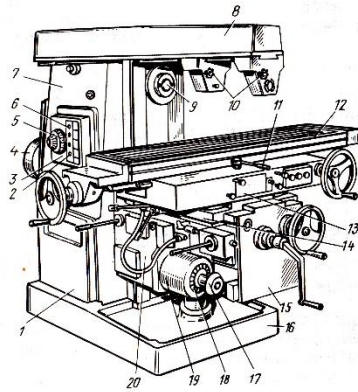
Horizontal universal knee-type milling machine, model 6P82: 1 — column; 2, 6 — pushbutton control panel; 3 — speed-change panel; 4 — main motor; 5 — spindle speed selection dial; 7 — speed gearbox (inside column); 8 — overarm; 9 — spindle; 10 — bearing brackets; 11 — longitudinal-feed control lever; 12 — work table; 13 — swivel plate; 14 — cross slide; 15 — knee; 16 — base plate; 17 — feed selection knob; 18 — feed dial; 19 — feed change mechanism; 20 — feed gearbox
